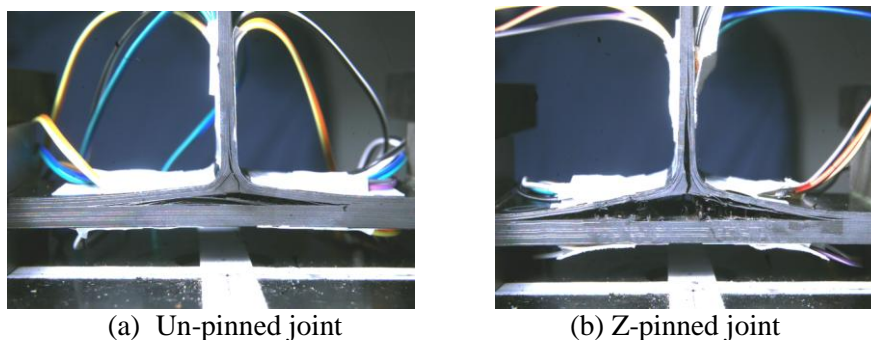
Damage before fracture for un-pinned and z-pinned composite T joints
